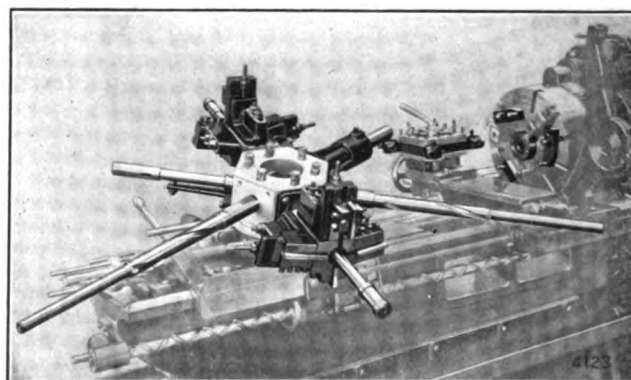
Gisholt Standard Turret Lathe Equipped with Set of Standard Chucking Tools
